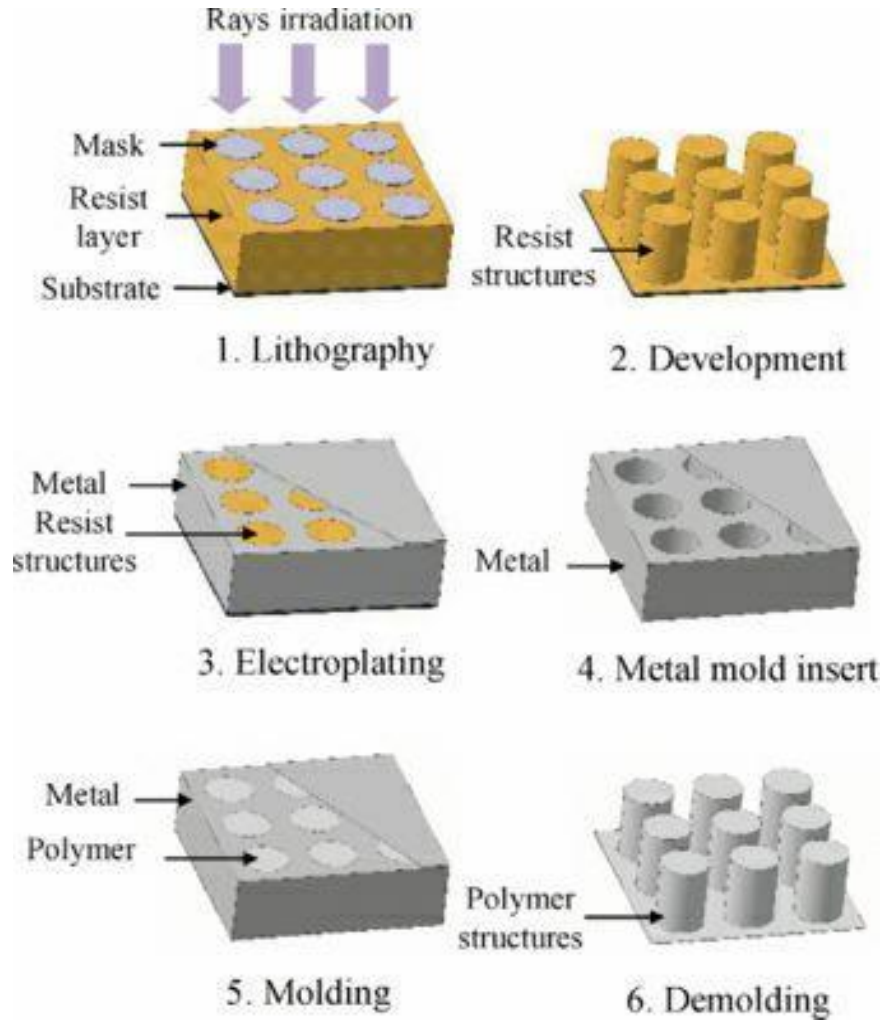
The figure shows the steps to fabricate a master mold and the microinjection moulding
